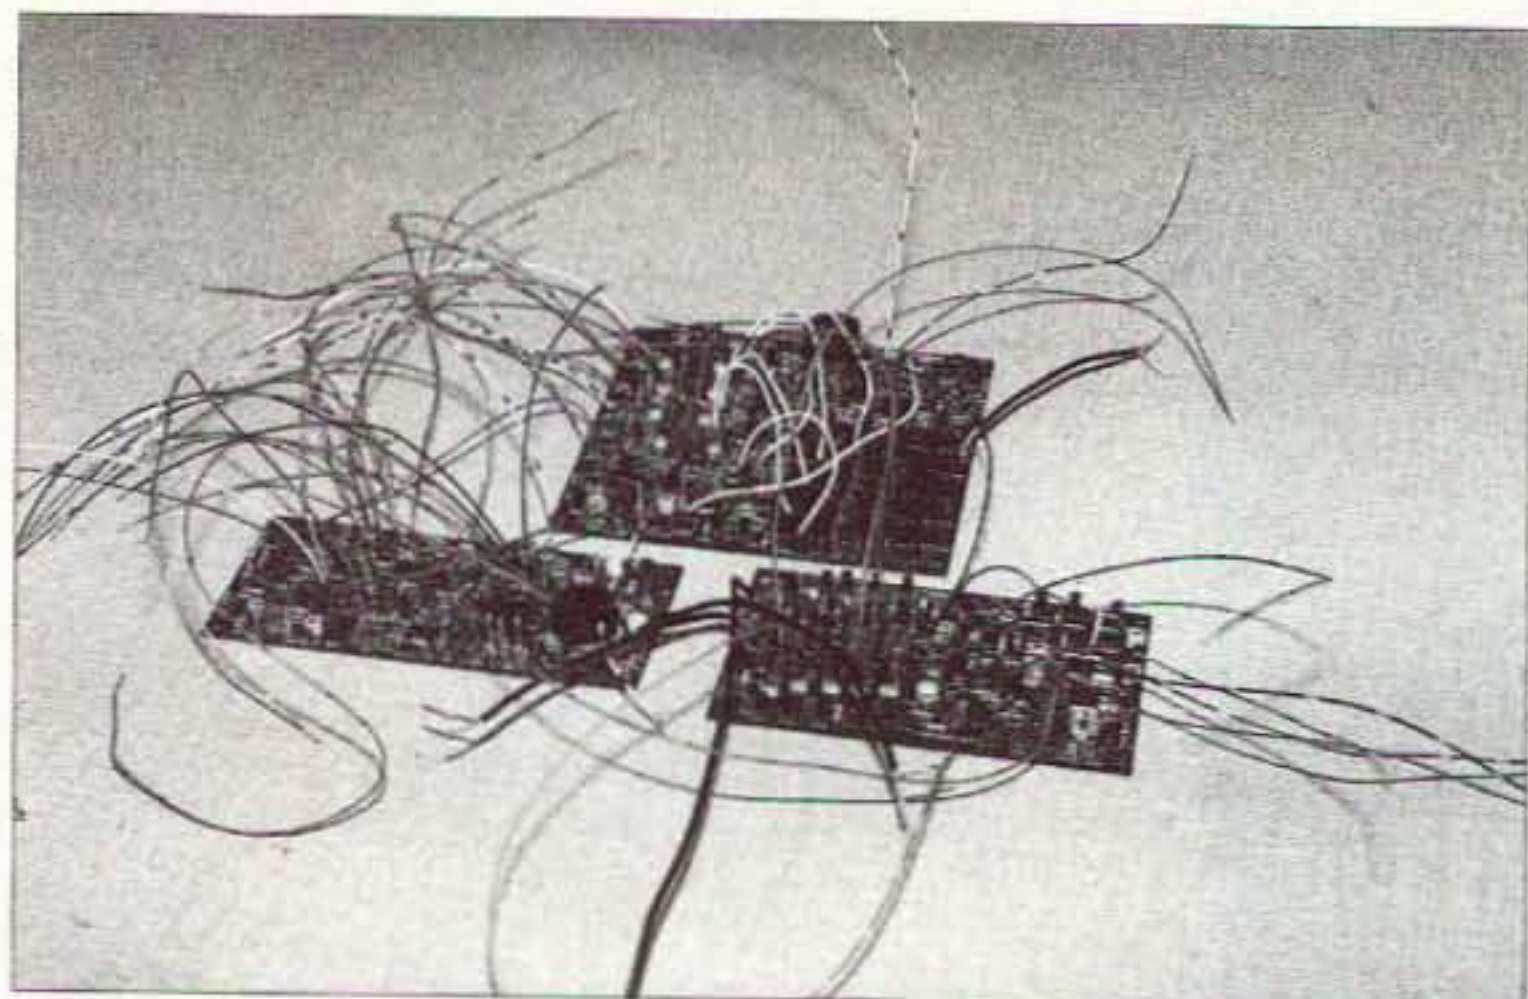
Photo C. The completed boards, ready for chassis assembly. Top: T/R board. Bottom left: Receiver board. Bottom right: Oscillator board.
